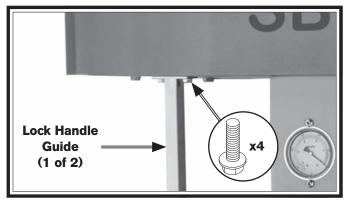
Housing assembly secured to rear panel and lock handle guides.
